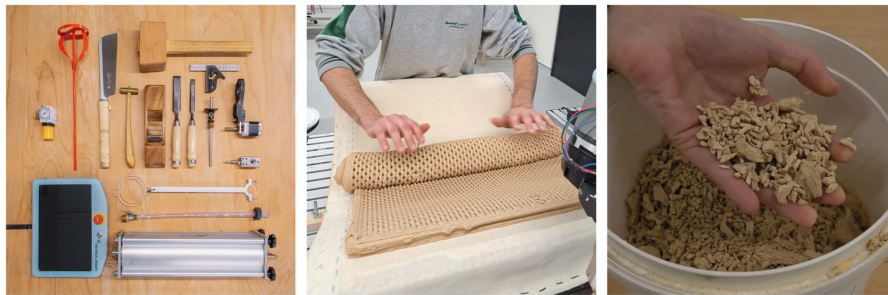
(left to right). Traditional and digital tools, Failed print for reuse, Shredded dry material
